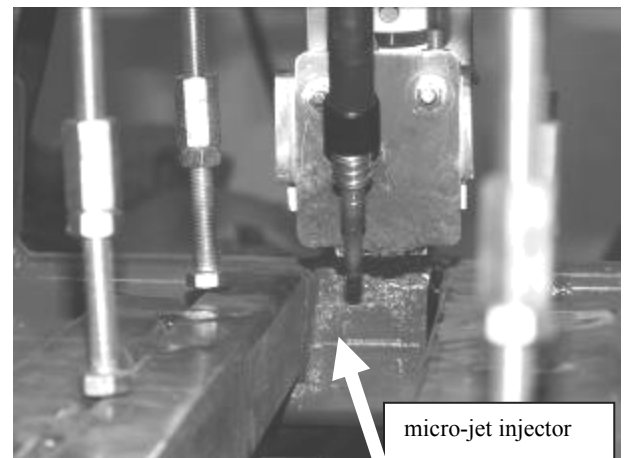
Equipment for MIG welding with micro-jet injector
